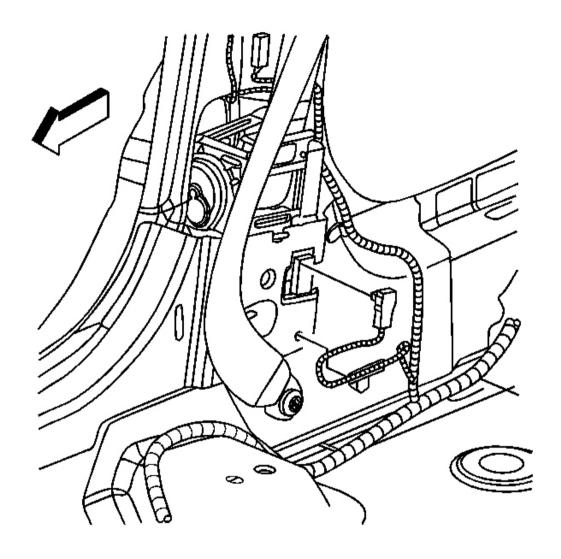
View Of Seat Belt Wiring Harness Routing Courtesy of GENERAL MOTORS CORP.
